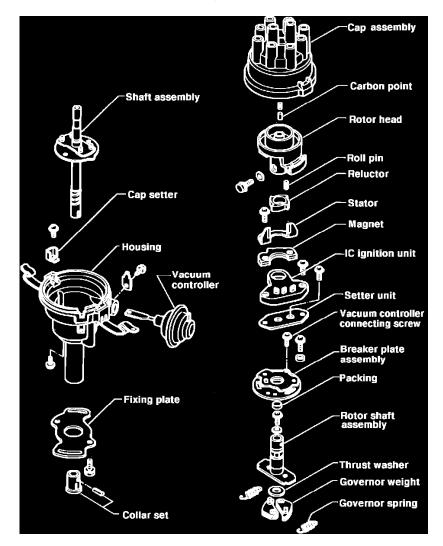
Exploded view of IC type distributor with internal IC unit (typical)
